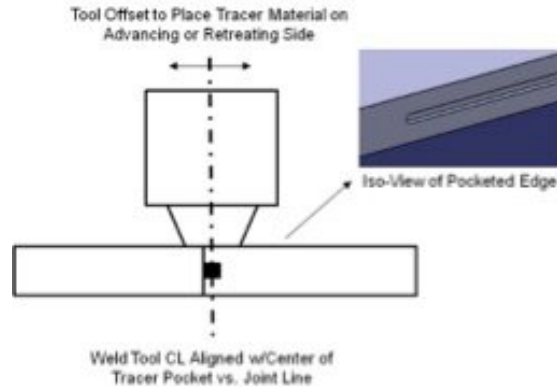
Schematic of Edge Prep for Tracer Material and Weld Tool Positioning.
